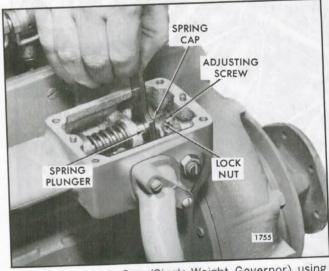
Adjusting Gap (Single-Weight Governor) using Tool J 5407
